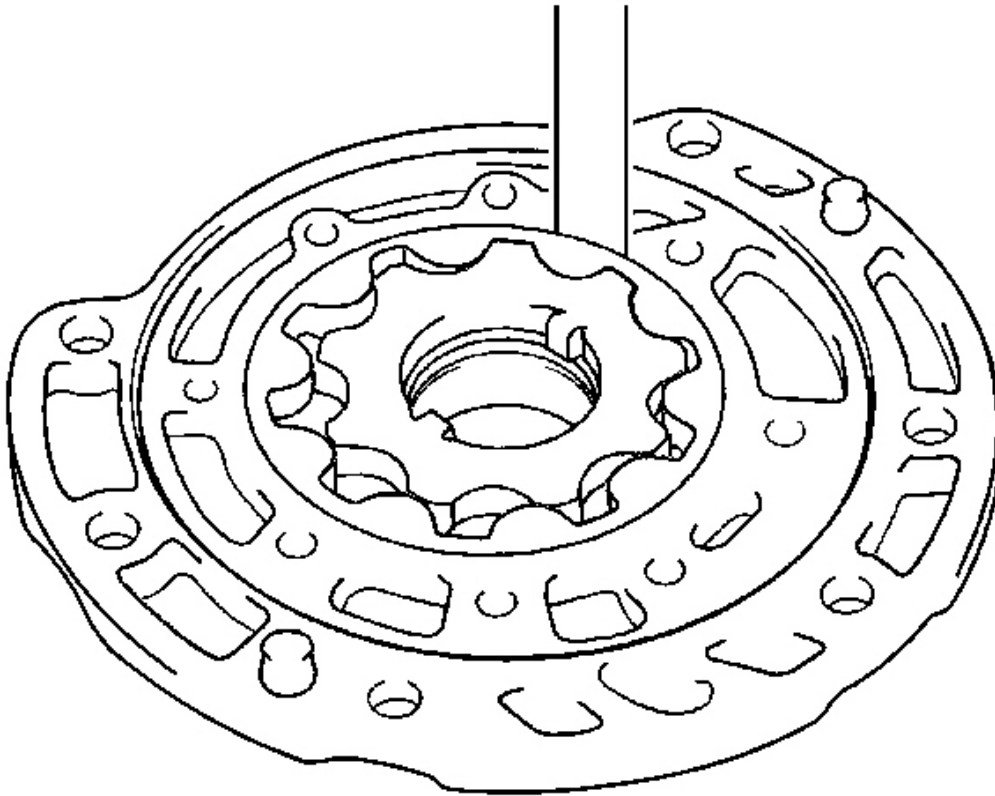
Measuring The Clearance Of Driven Gear Using A Feeler Gage
